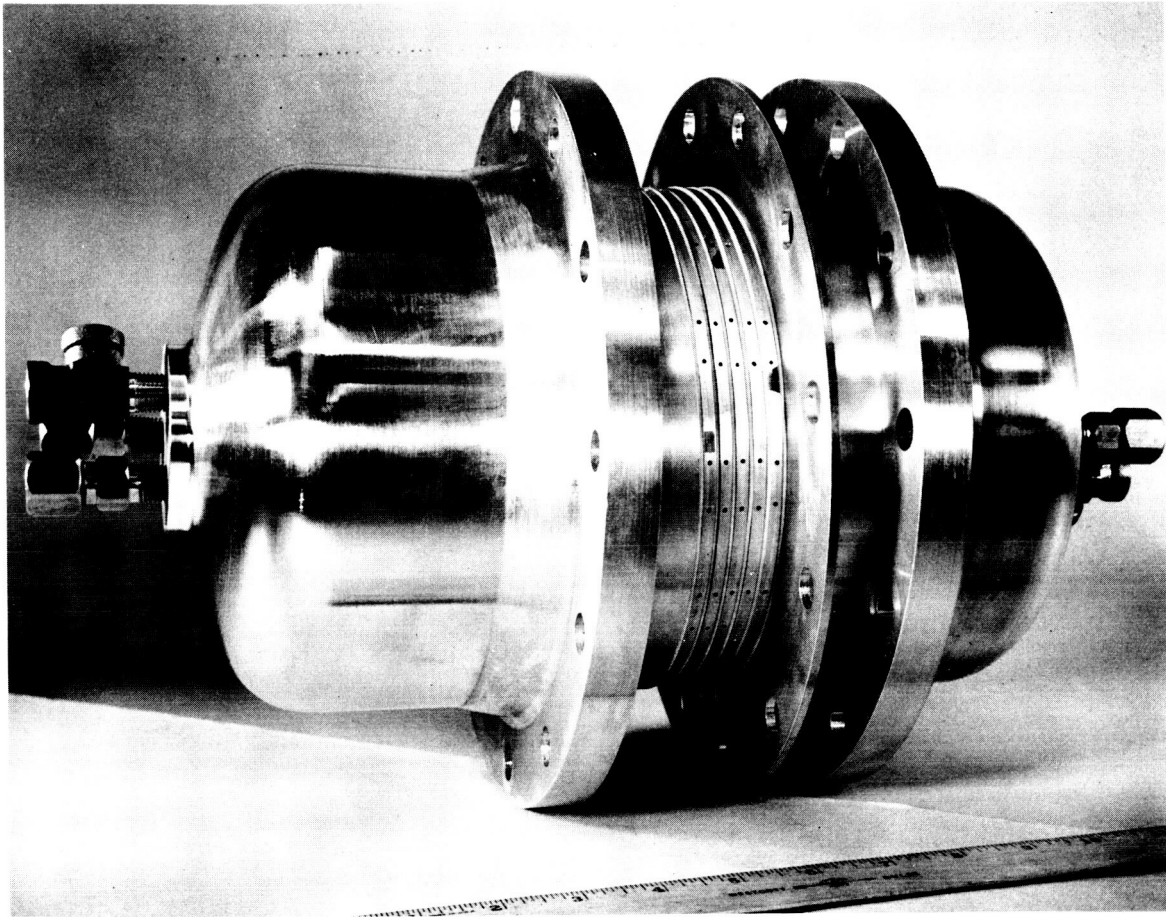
FUEL CELL ASSEMBLY PARTIALLY DISASSEMBLED
